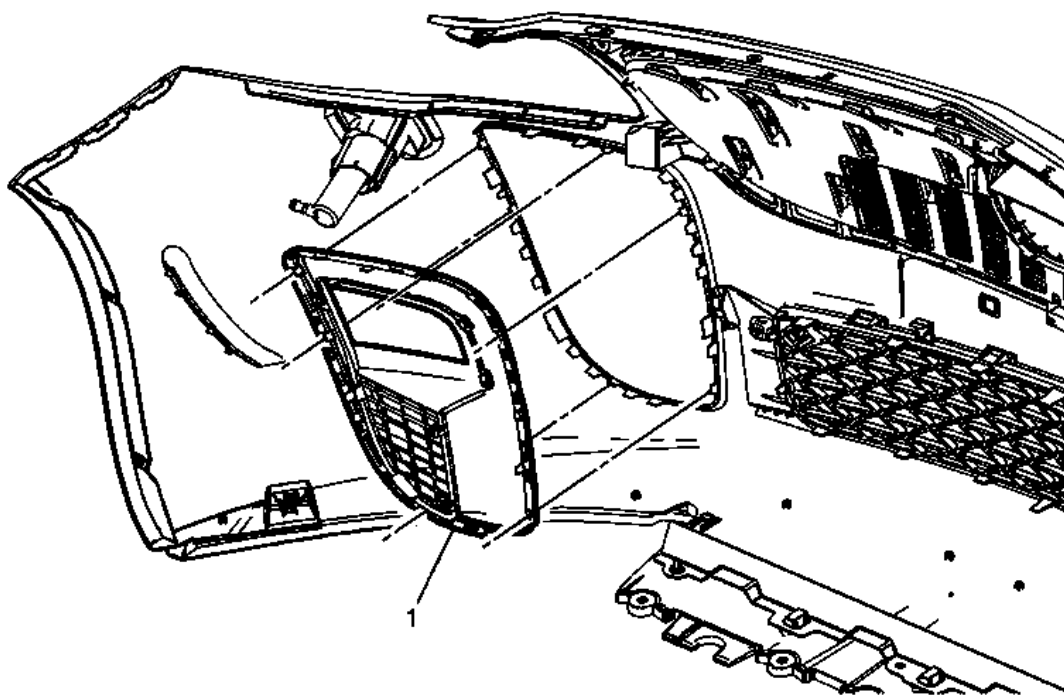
Front Bumper Fascia Outer Insert Molding (GS)
